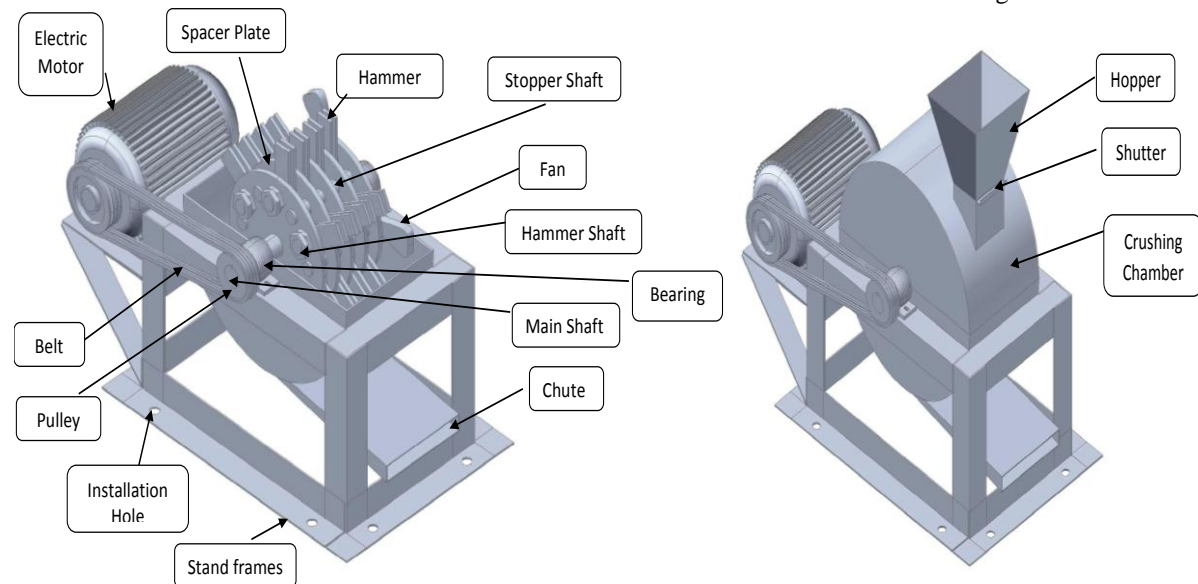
Sectioned and Complete views of the Improved Hammer mill
